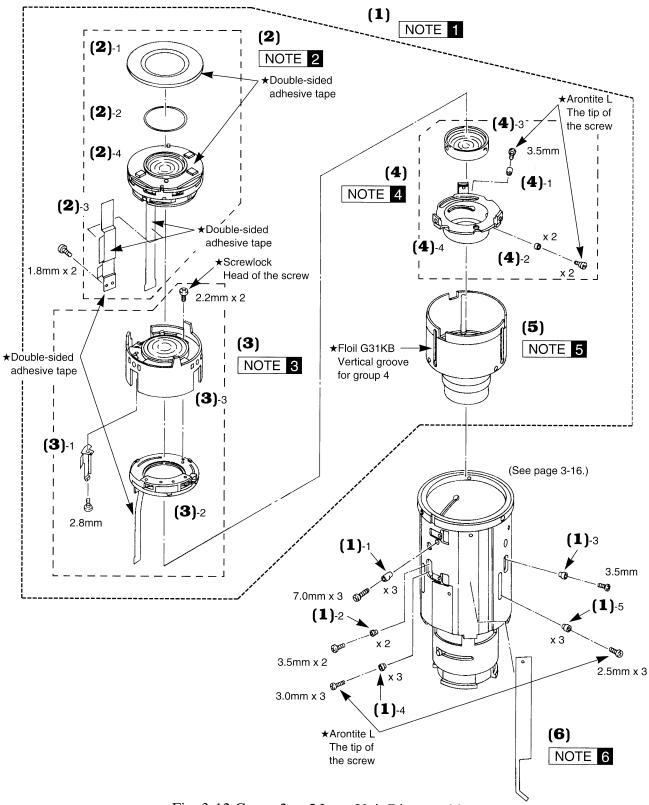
Group 2 to 5 Lens Unit Disassembly
